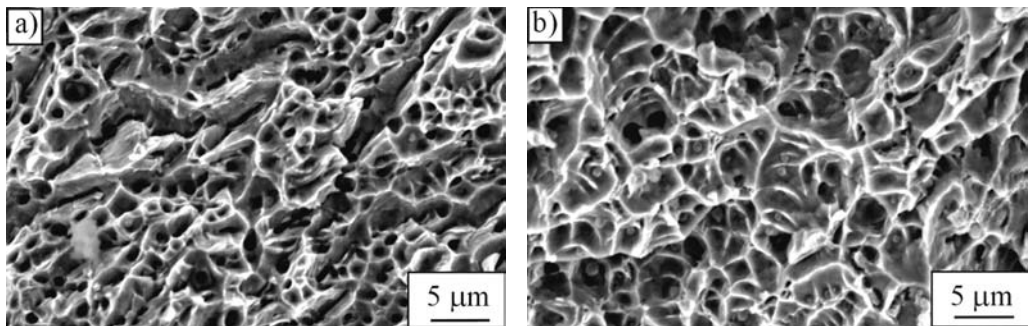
SEM microfractograph of AISI 316L steel weld metal after Charpy impact testing; DF - ductile fracture, CF - cleavage fracture
